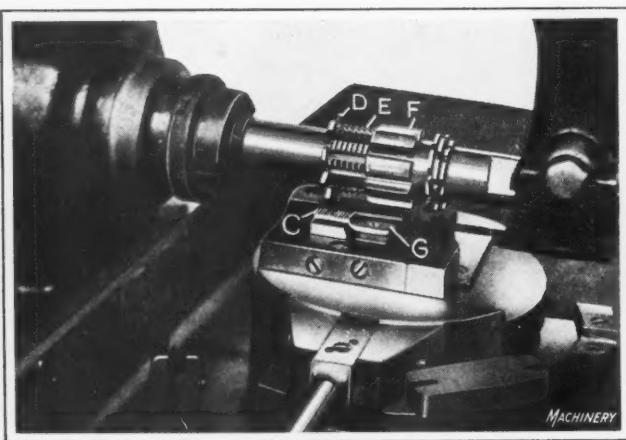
Milling Fixture in Position for cutting Teeth on Part shown in Fig. 1
